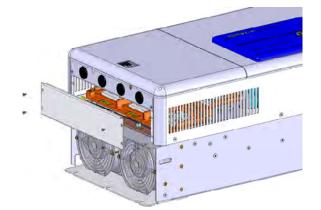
Removal of the bottom plate, to access the power terminals - frame sizes F, G and H
